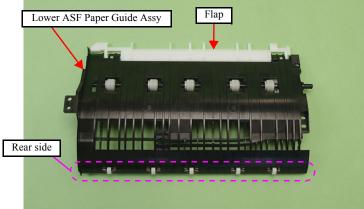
Installing the Lower ASF Paper Guide Assy
